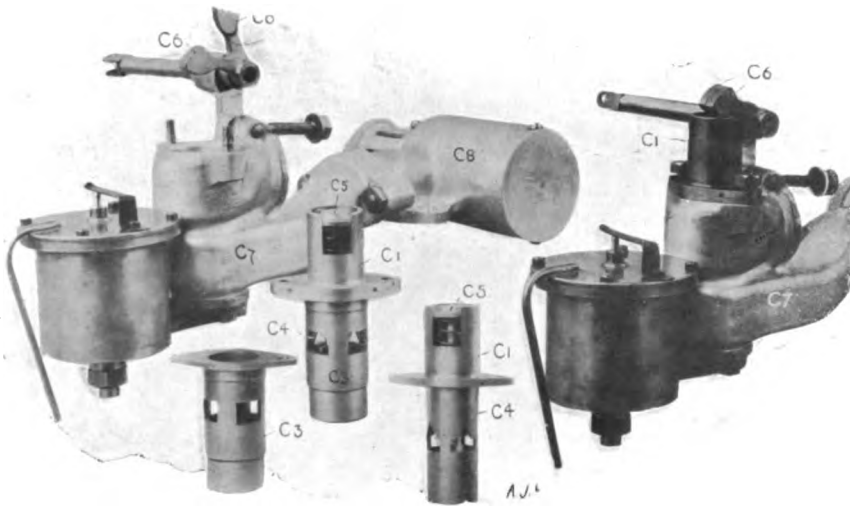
The Wolseley Combined Carburettor and Throttle-Valve, showing the complete apparatus with the entire Throttle-Valve lying alongside, the Throttle-Valve taken apart, and a portion of the Carburettor with the Throttle-Valve fitted in place.
